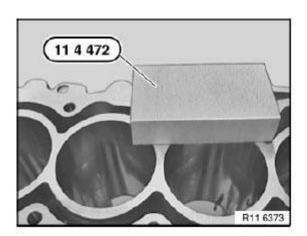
Removing Fine Gasket Remnants Using Special Tool (11 4 472) Courtesy of BMW OF NORTH AMERICA, INC.
